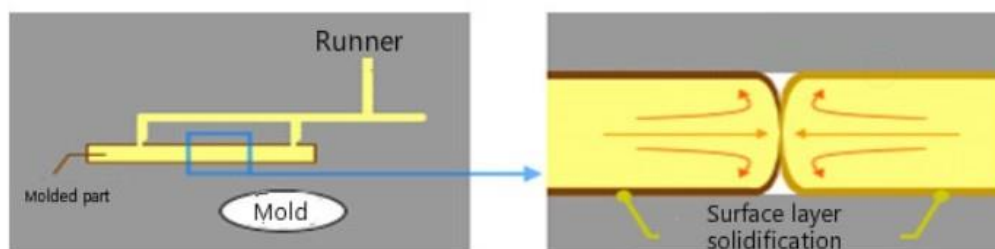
Example of welding lines in injection molding; adapted from⁴⁵.
